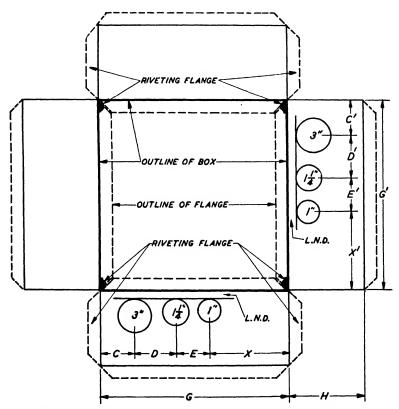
Sheet Steel Box Layout for a Surface Mounted Pull Box with Screw Cover
